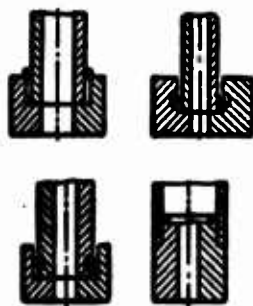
Laying of solder in places of joining of components stamped from sheet material: a) solder in the form of foil; b) solder in the form of wire: 1 and 2 - combinable components 3 - solder.
